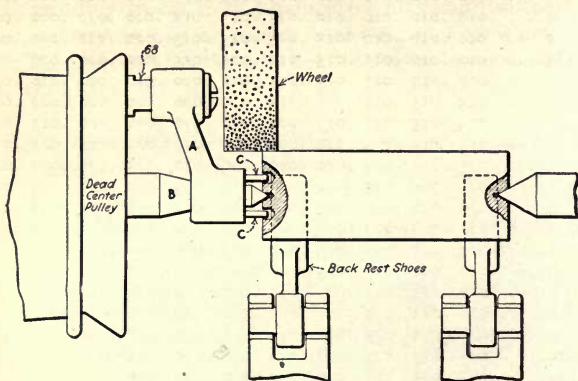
End driving-dog for use on Brown & Sharpe grinding machines.
